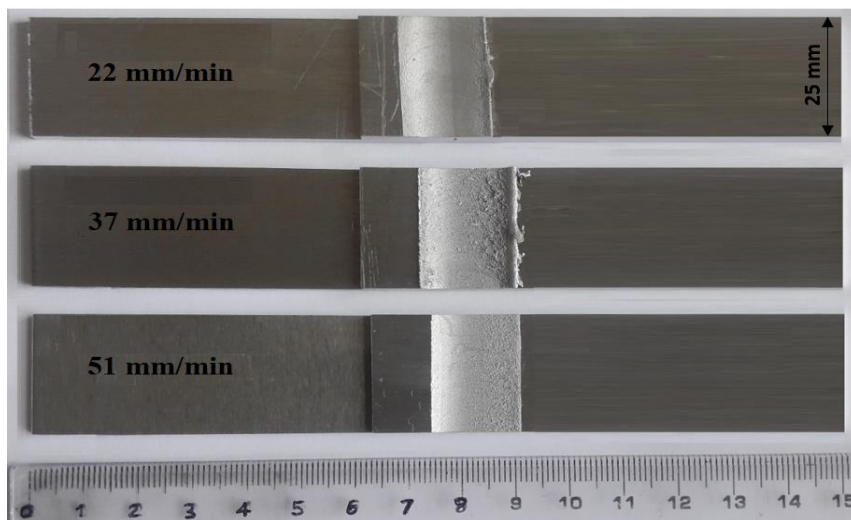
Tensile specimens of FSLW joints produced at different tool feed rates
